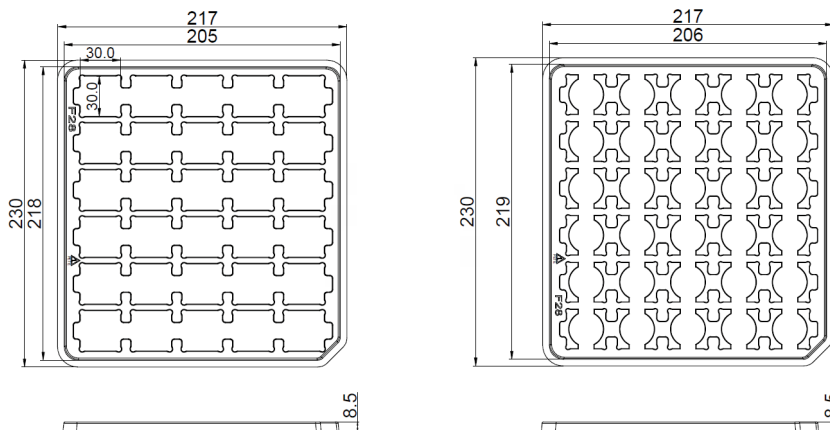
Tray dimensions for L2C6-xxxxxL11x2200.
